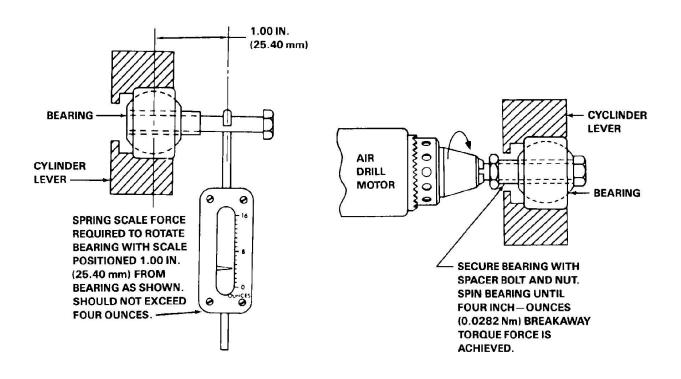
Tail Rotor Hydraulic Cylinder Lever Bearing
